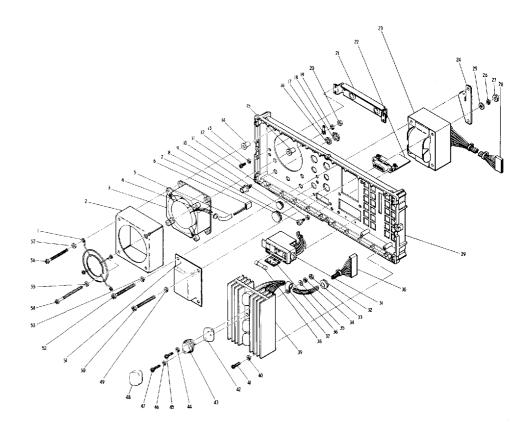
Rear Panel Illustrated Parts Breakdown
